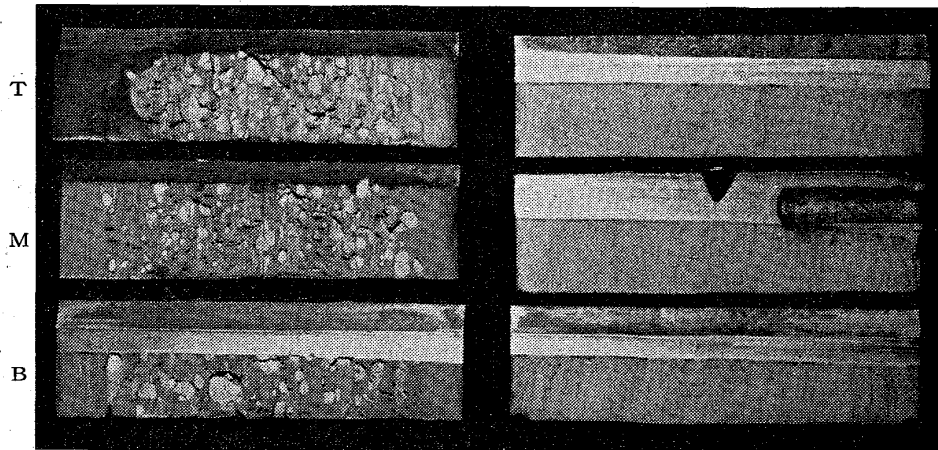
Break out test pieces of SAE 4150 that shows the effect on vanishing of flakes by vacuum casting.
